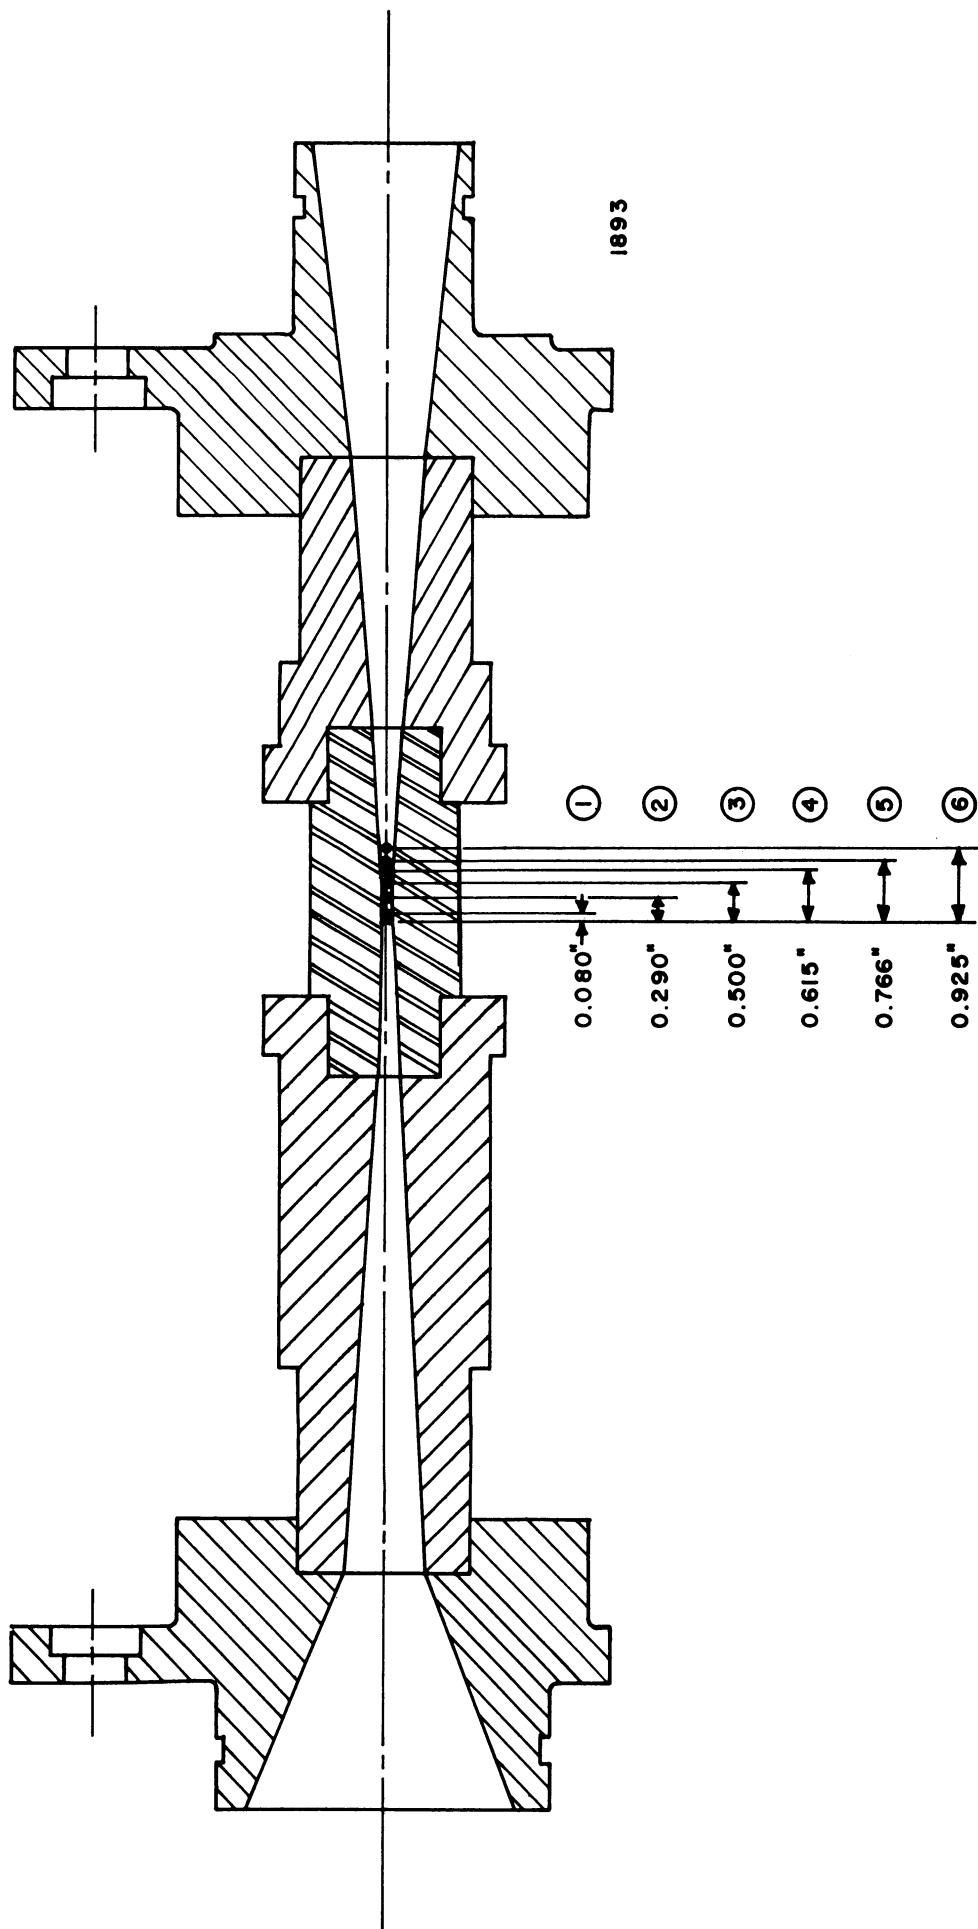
Pressure tap locations and water loop installation geometry for 1/8" plexiglas venturi.
